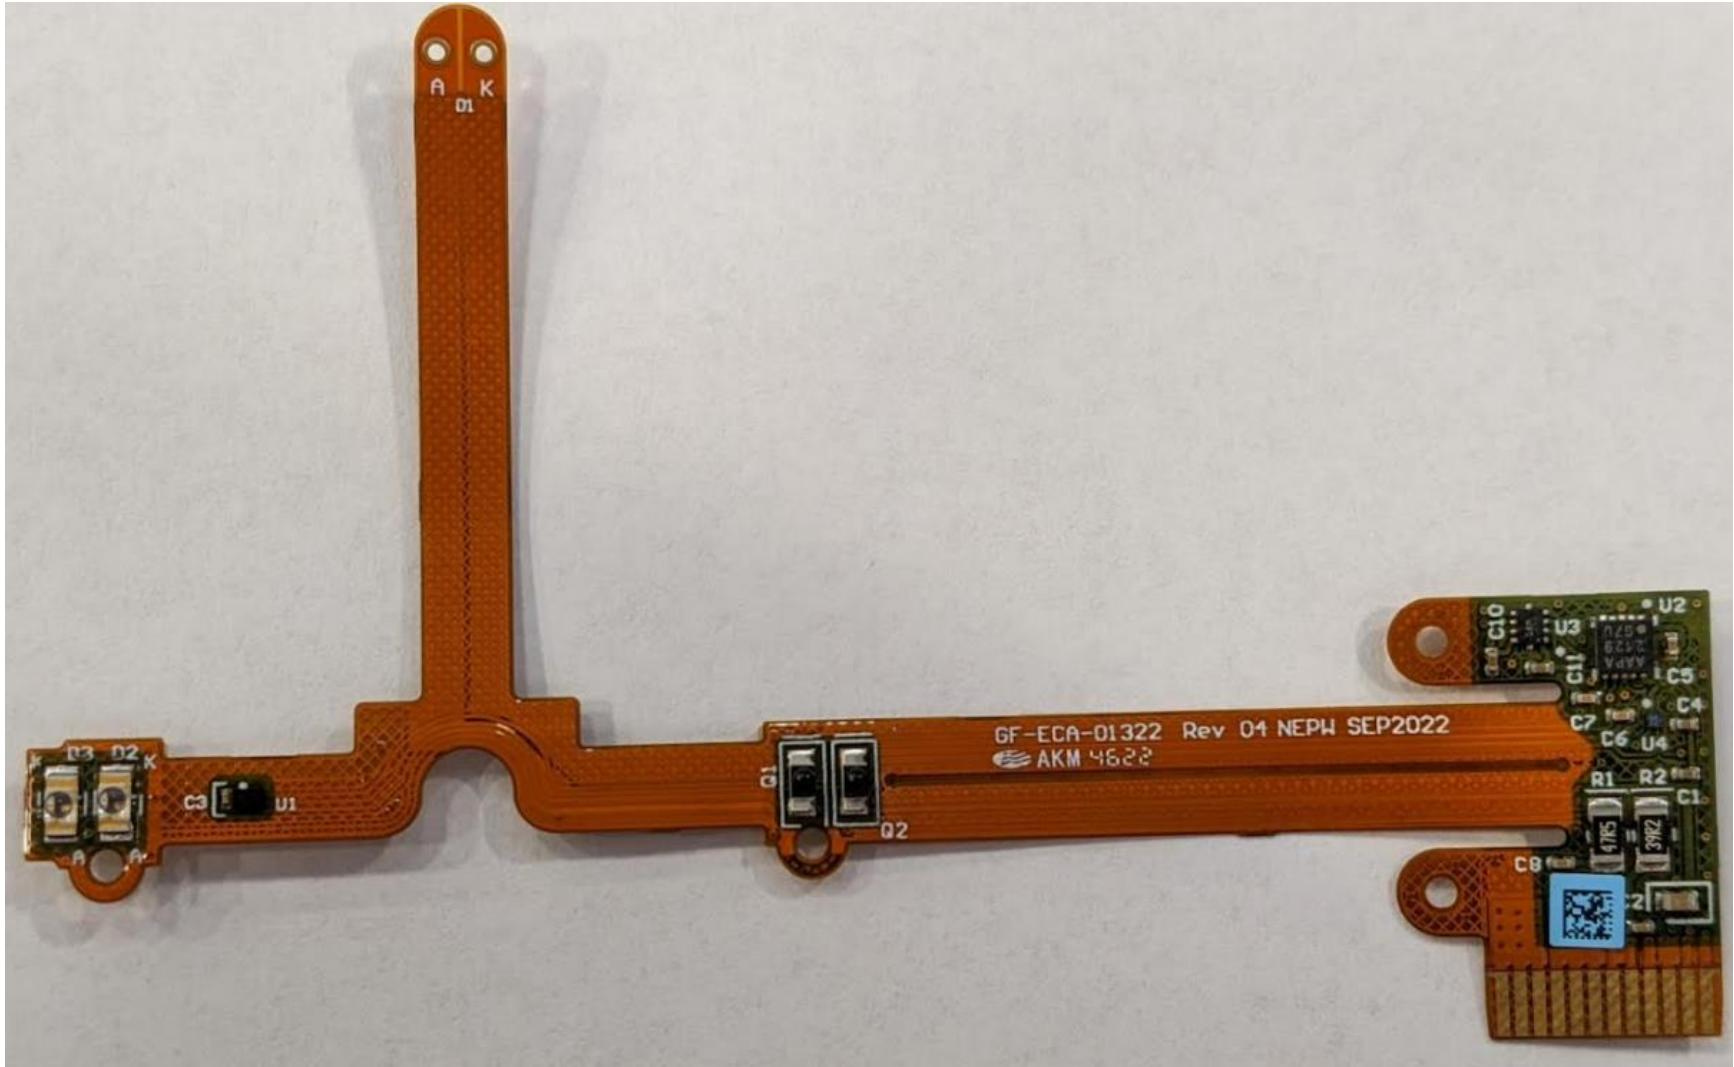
GF-PCA-00173- Head Flex PCBA - Top Side
